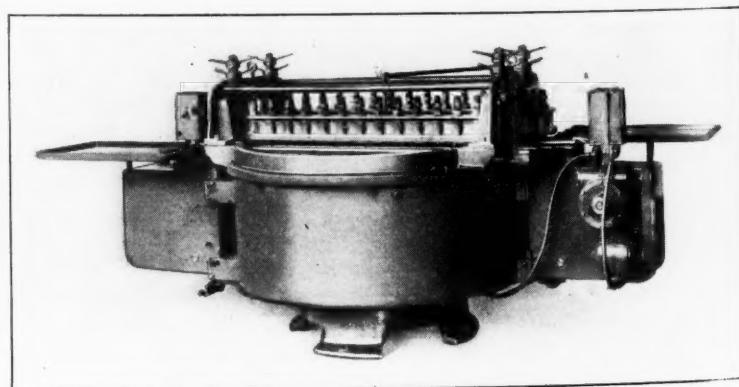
Vertical Grinder Equipped for Removing Burrs from Nuts
